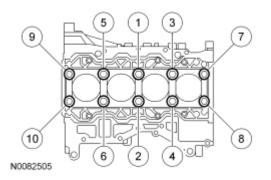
Identifying Main Bearing Beam Bolts Tightening Sequence
